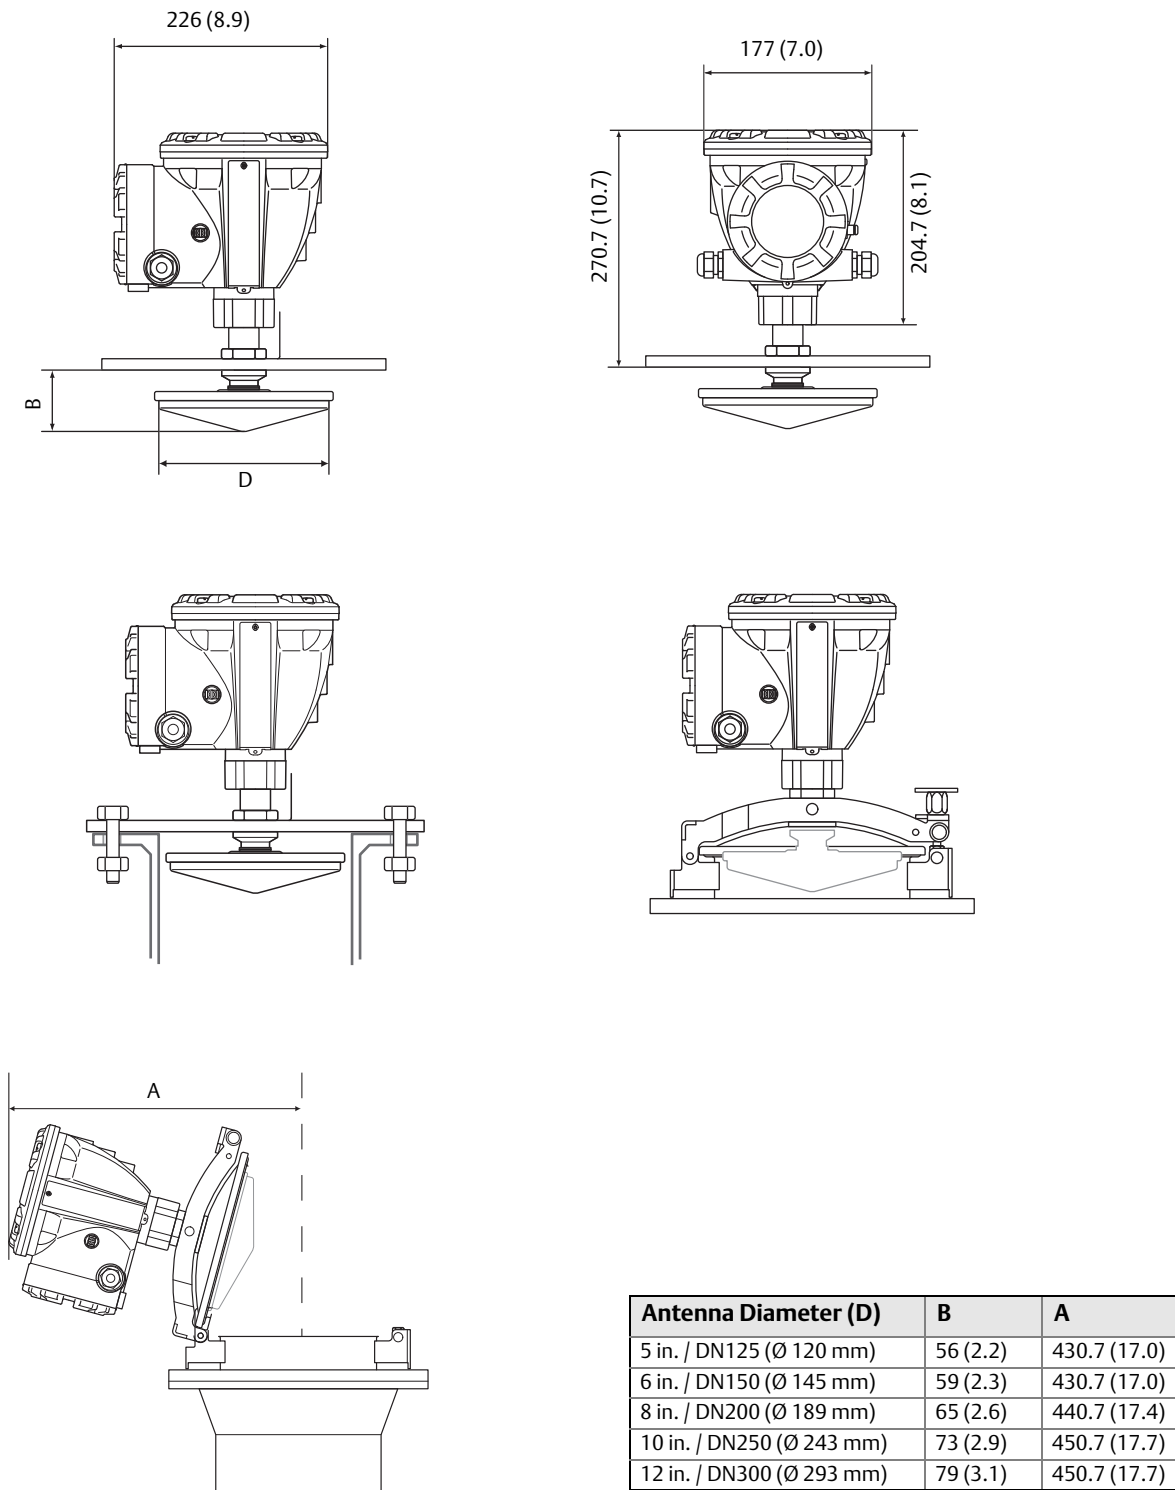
Rosemount 5900C with Cone Antenna Dimensions
